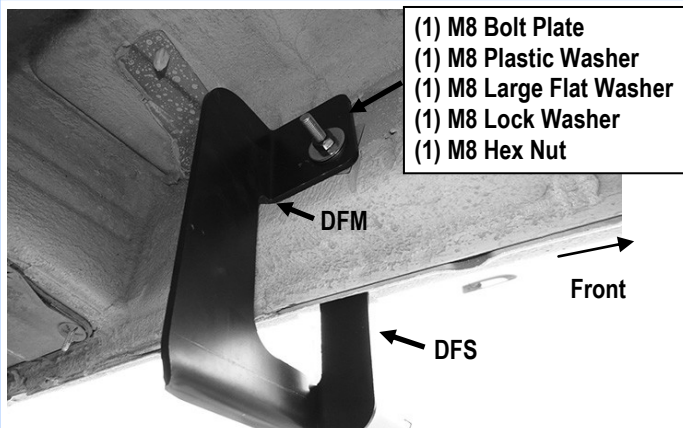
Driver Front Mounting Bracket (DFM) and the Driver Front Support Bracket (DFS) Assembly
